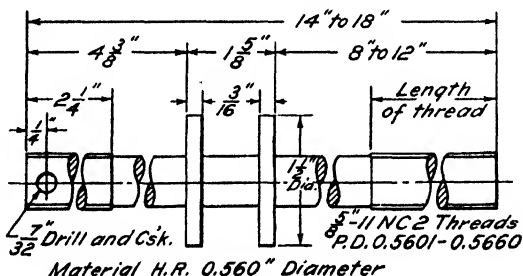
By the use of spring dies, a piece of this shape with flanges between the ends is produced in upsetting or hot-heading machines.
